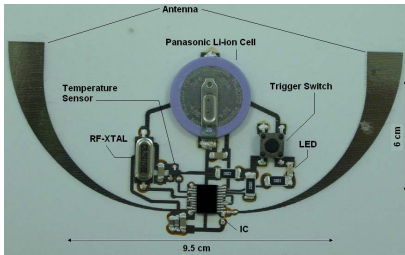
Wireless Sensor transmitter prototype on paper substrate using silver inkjet printing technology.
